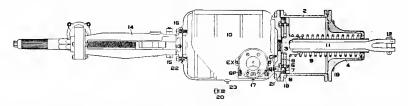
Brake Cylinder, 12 in. by 8 in., with Slack Adjuster.
